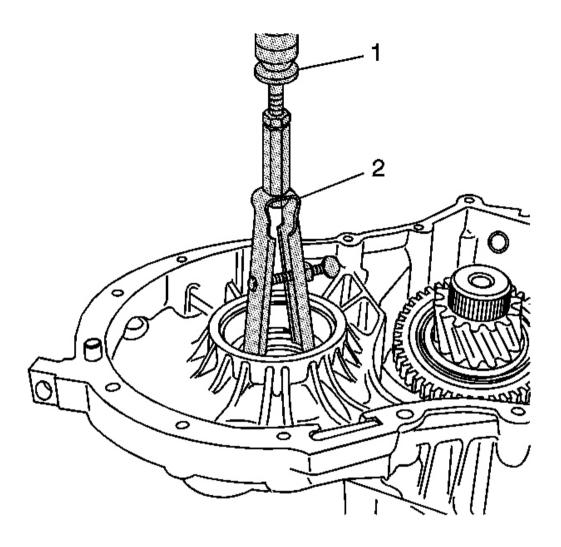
Removing Counter Shaft Bearing & Shaft Ring Using The J 44381 And J 7079-2 Courtesy of GENERAL MOTORS CORP.
